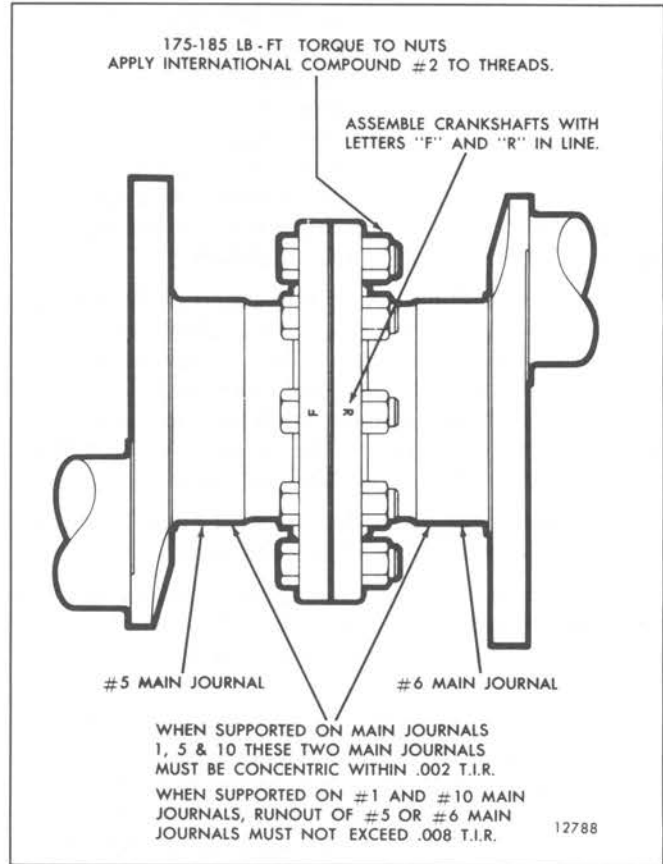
Two-Piece 12V-92 and 16V-92 Crankshaft Assembly Instructions
